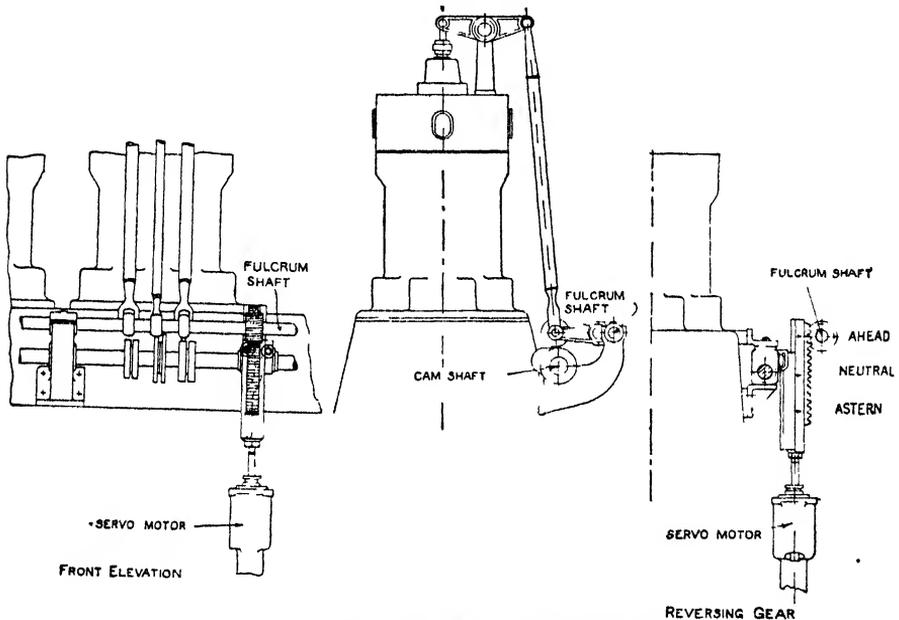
Types of Valve Gear, &c, Burmeister & Wain System
